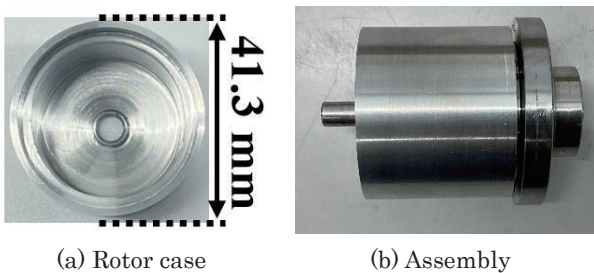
Appearance of the measuring motor used for mechanical loss measurement (Shaft + rotor case).
